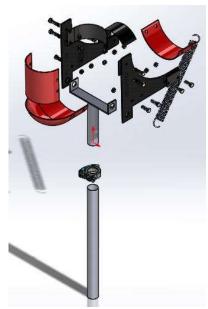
CAD Model, Isometric Exploded View of Prosthesis Adapter
